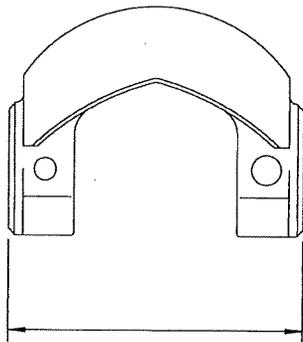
Dimensions of Ball in Ball / Shaft Assembly
